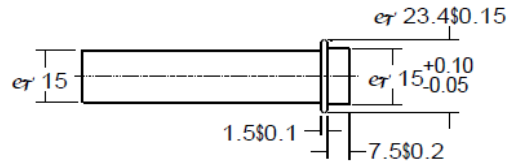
Pipe end for "O"-ring connection for G^{3/4}" external thread
